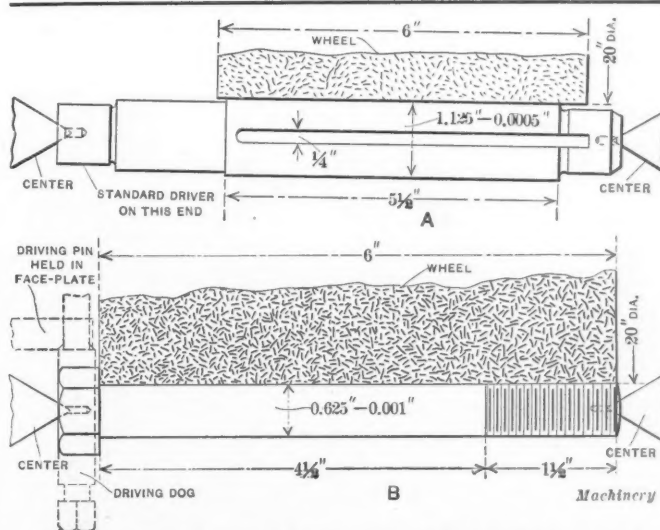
Examples of grinding Automobile Transmission Countershaft and Automobile Front Axle Spindle Bolt by Form Wheel Method
